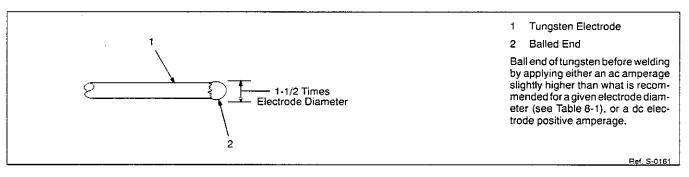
Preparing Tungsten For AC Or DC Electrode Positive (DCEP) Welding
